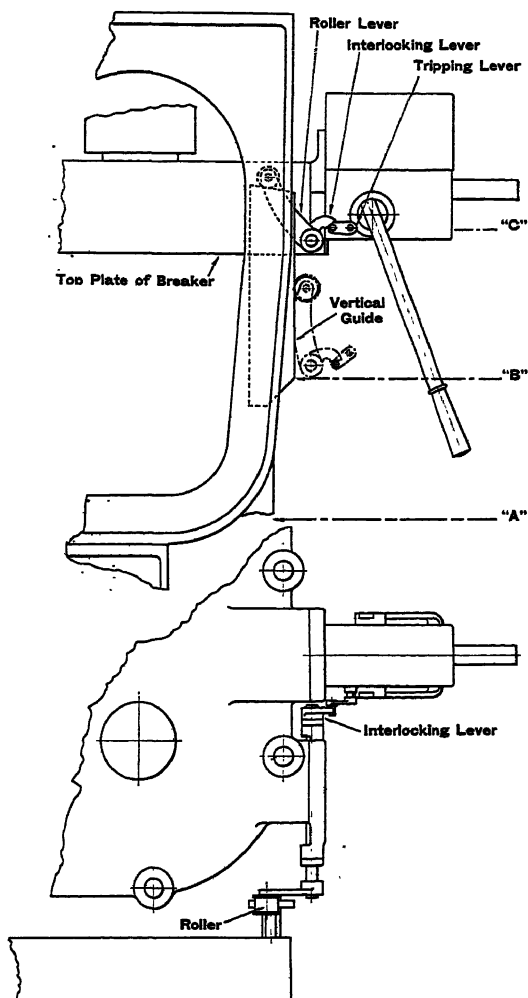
MECHANICAL INTERLOCK BETWEEN CIRCUIT BREAKER AND LOWERING GEAR
